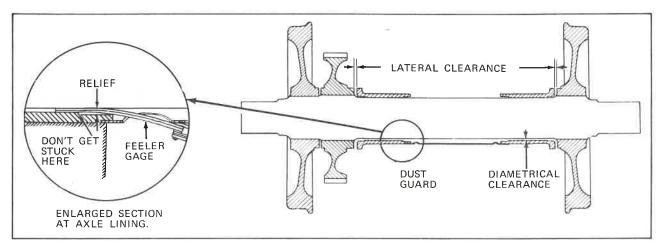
MEASURING DIAMETRICAL CLEARANCE OF LININGS.
